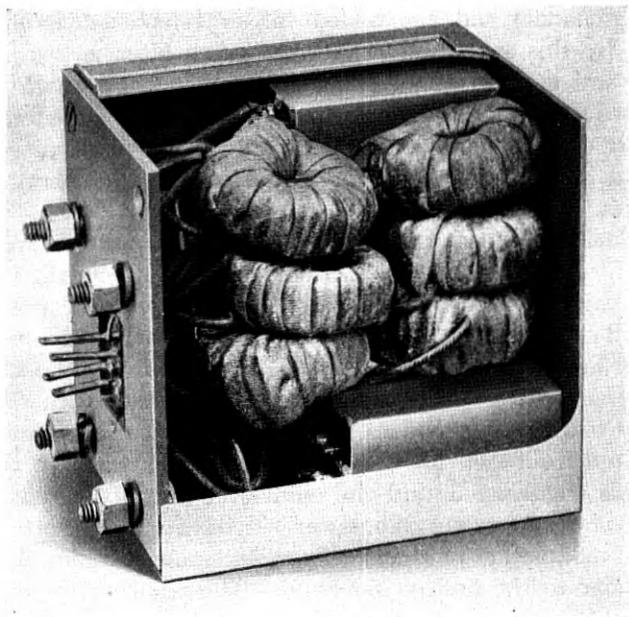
Filter (with cover cut away) showing general method of assembly.
